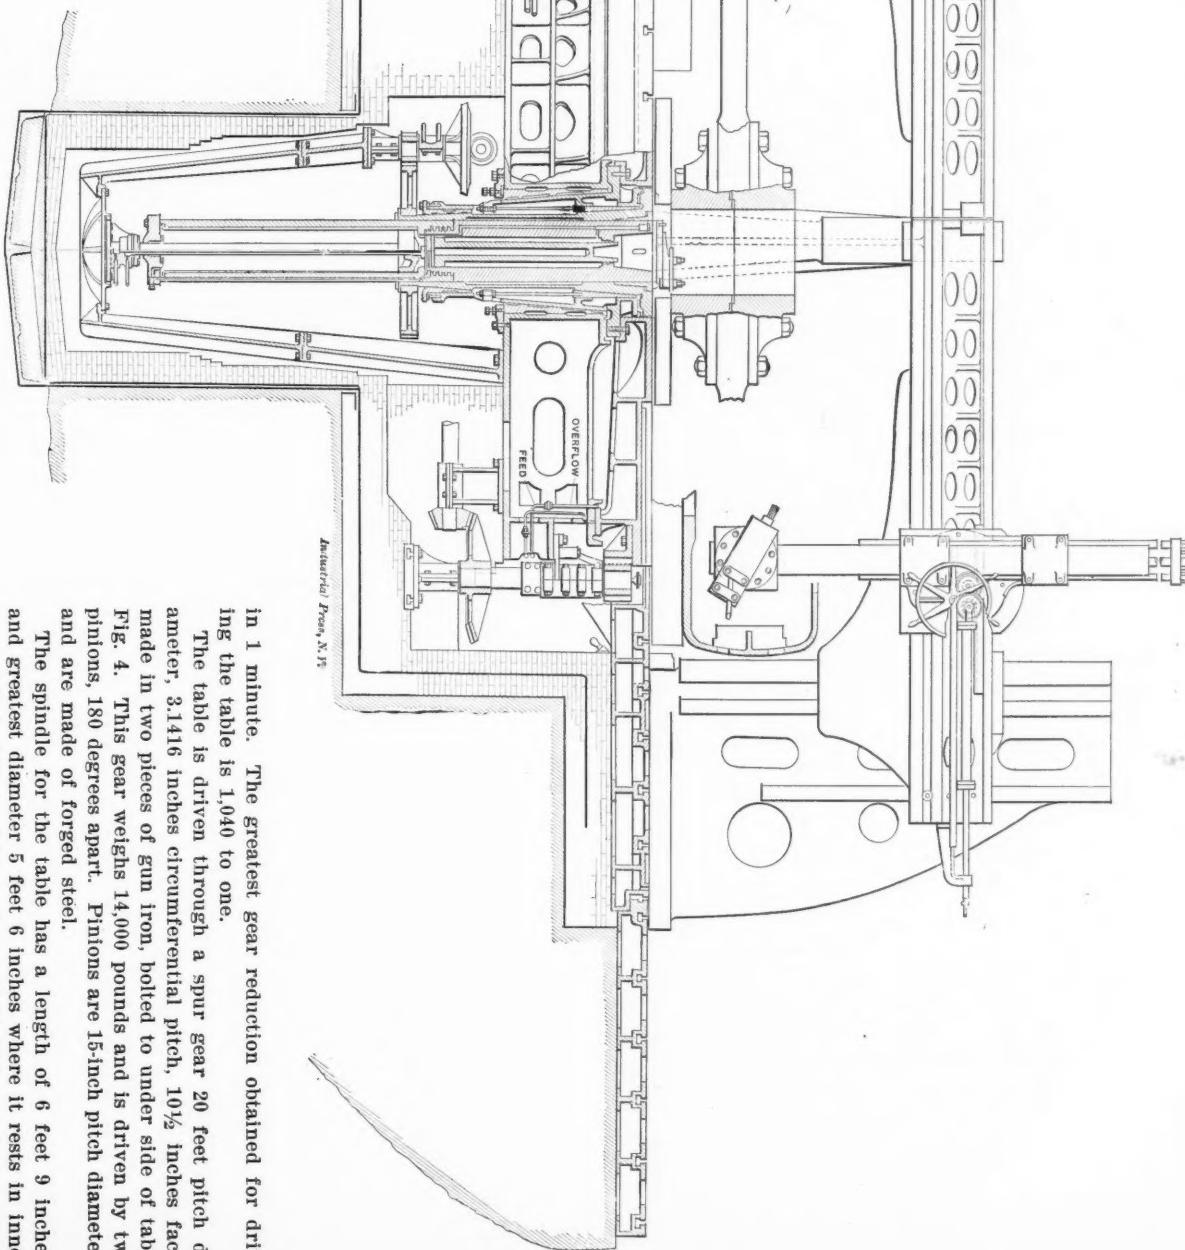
SECTIONAL ELEVATION THROUGH BORING MILL.
